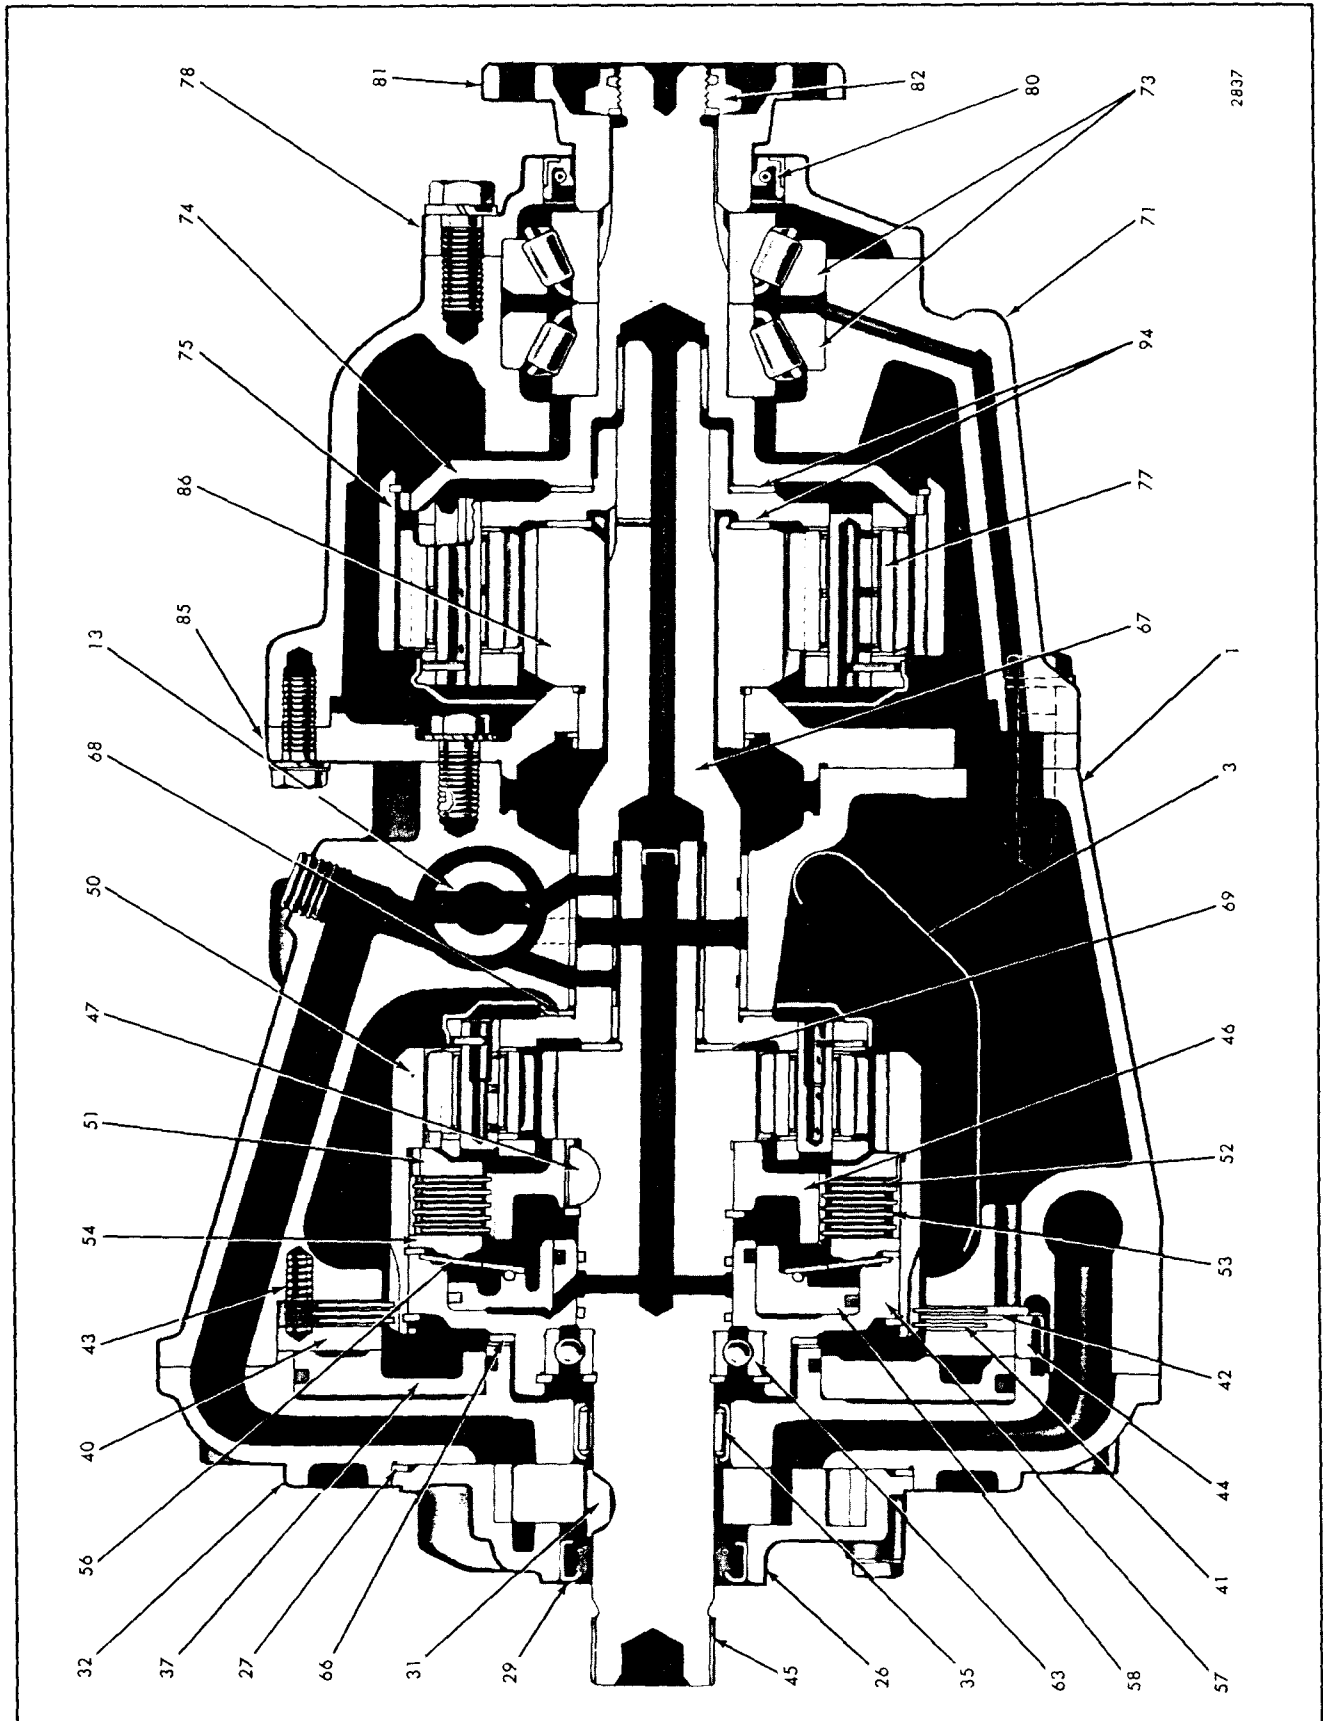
Warner Marine Gear Assembly (2.1:1 Ratio Model 71C Shown)
